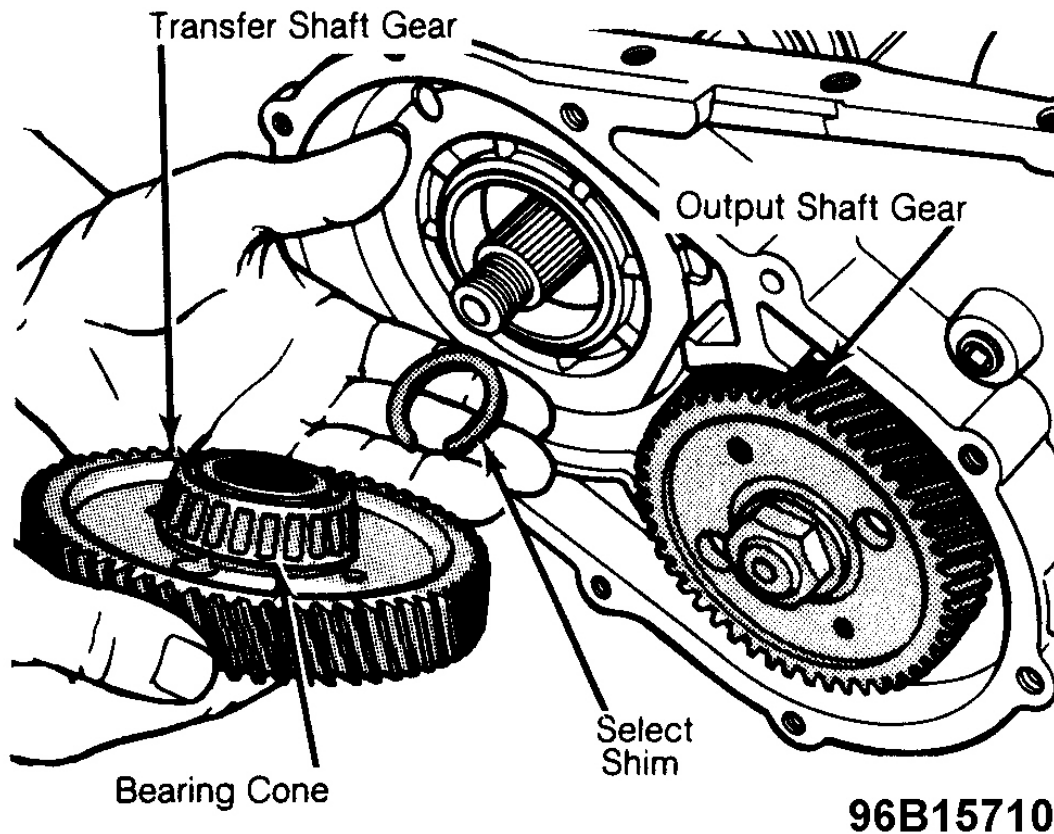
Transfer Shaft With Gear Removed to Show Adjusting Shim
